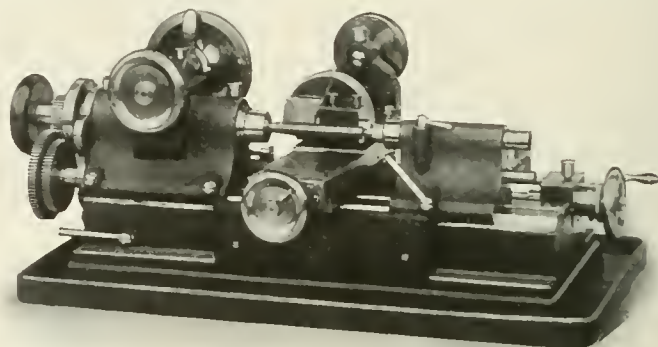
Thread Milling Machine for Small Precision Work, made by the Waltham Machine Works, Waltham, Mass.
